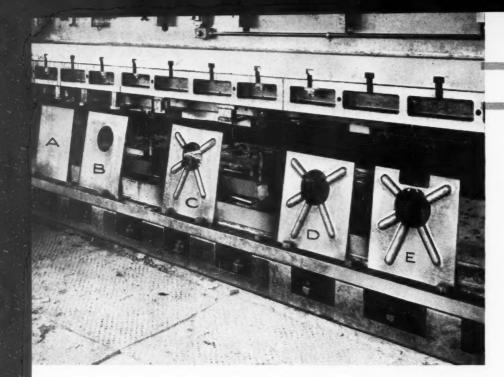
Progressive shapes produced in manufacturing bevelgear bearing support plates for steering-clutch cases. The sheared blank is seen at left and a completed plate at right
